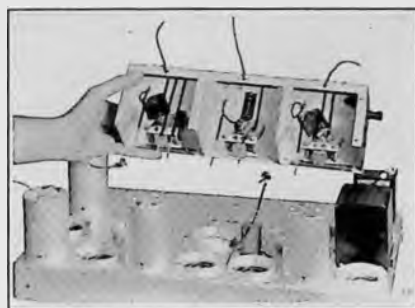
The tuning assembly removed to show the inductance slide wires. Complete access is possible by removing the flat back plate as shown. The terminal strips at the top permit easy connection to the set terminals which appear on a similar strip to be installed on the chassis.
